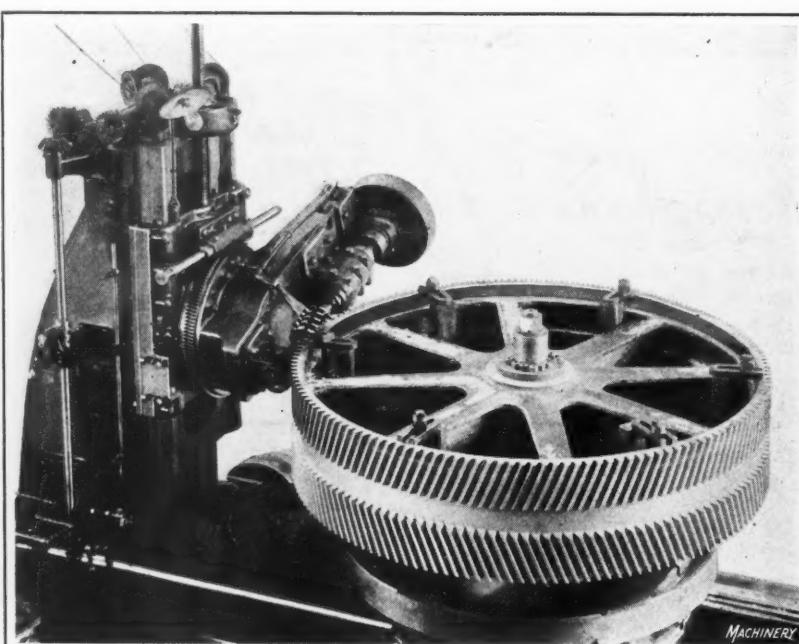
Cutting a Double Helical or Herringbone Gear on a Hobbing Machine
